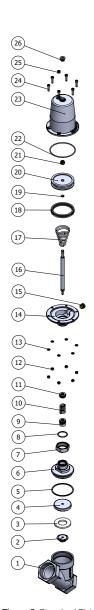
Standard Piston Valve N.C. Exploded Picture
